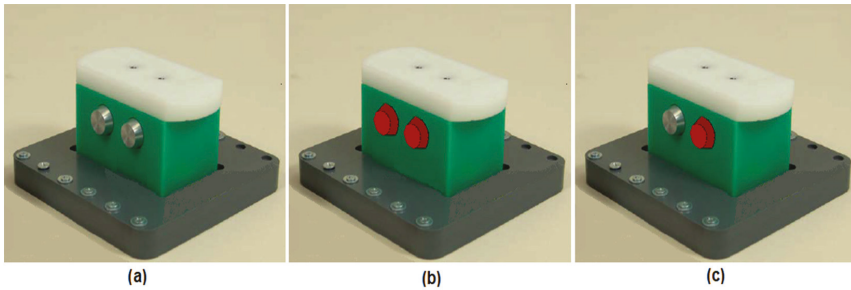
Assembled workpieces: (a) workpiece with metal cylinders; (b) workpiece with plastic cylinders and (c) workpiece with different cylinders.
